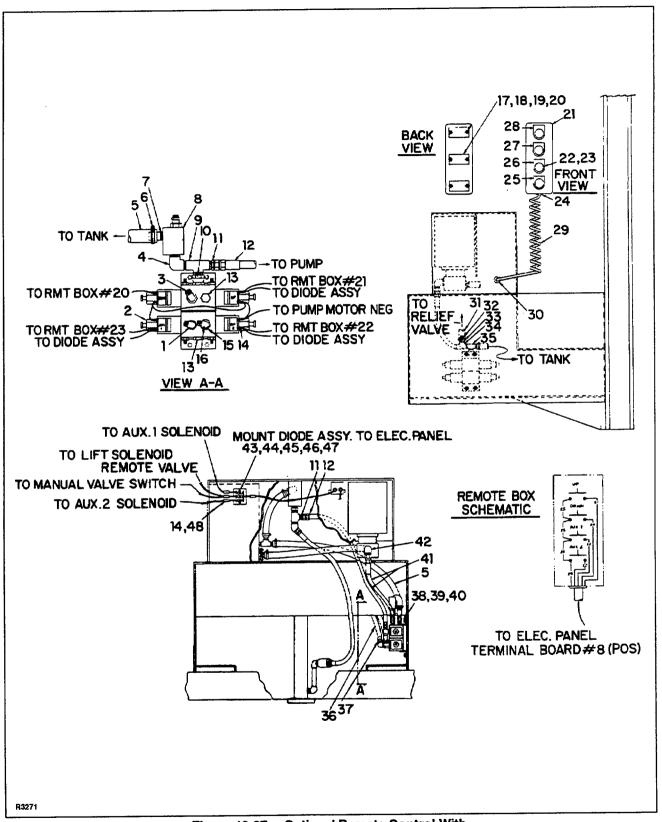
Optional Remote Control With Auxiliary Hydraulics (Sheet 1)
